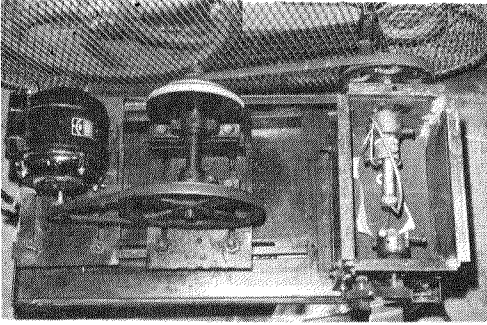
(a) Shot peening equipment showing driving unit, condenser tube & holders.
